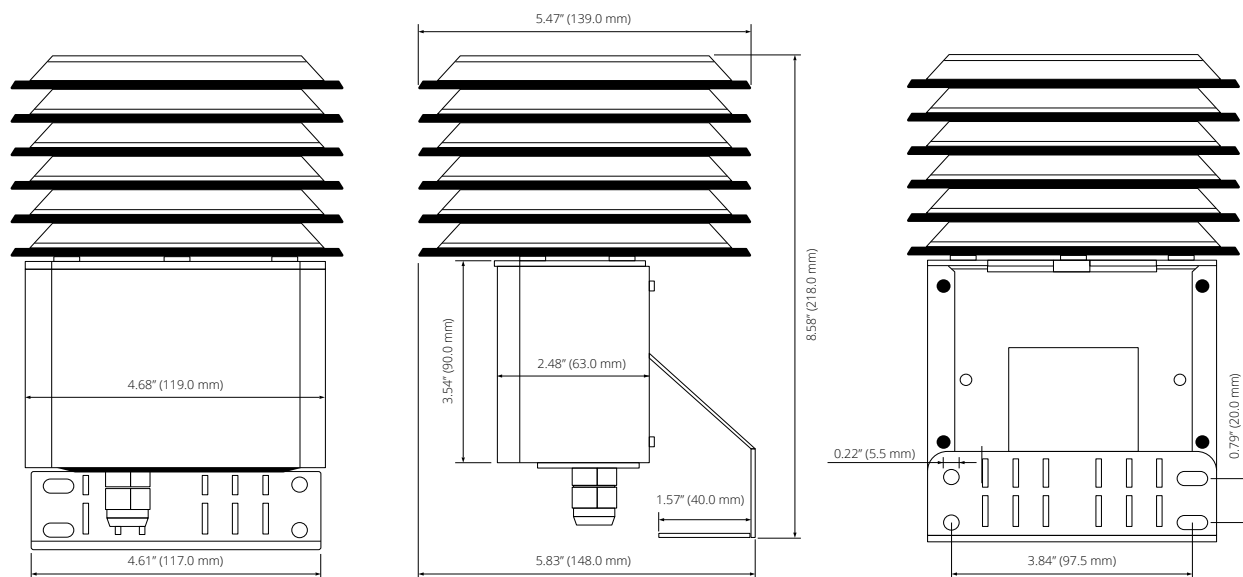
AcuHUM OAW Front, Side, and Rear Views
